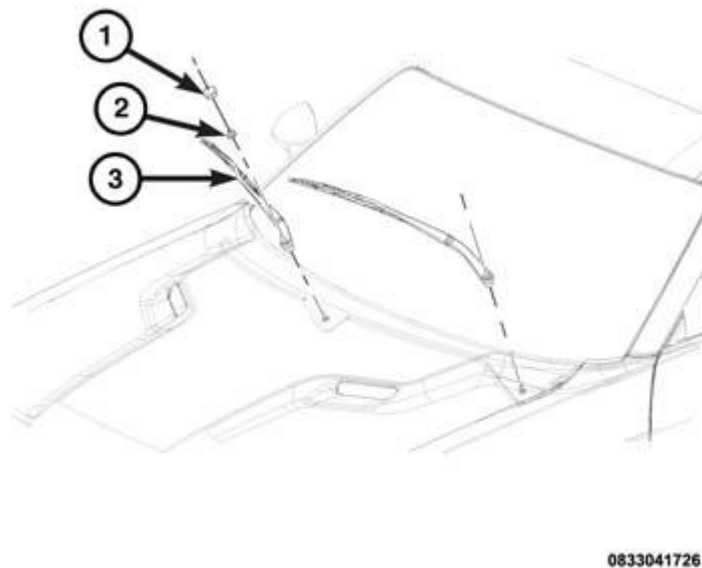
Wiper Arm / Blade, Plastic Nut Cap & Nut
